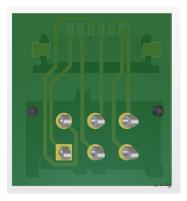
3D2 PCB 7: Programming Periphery Board
